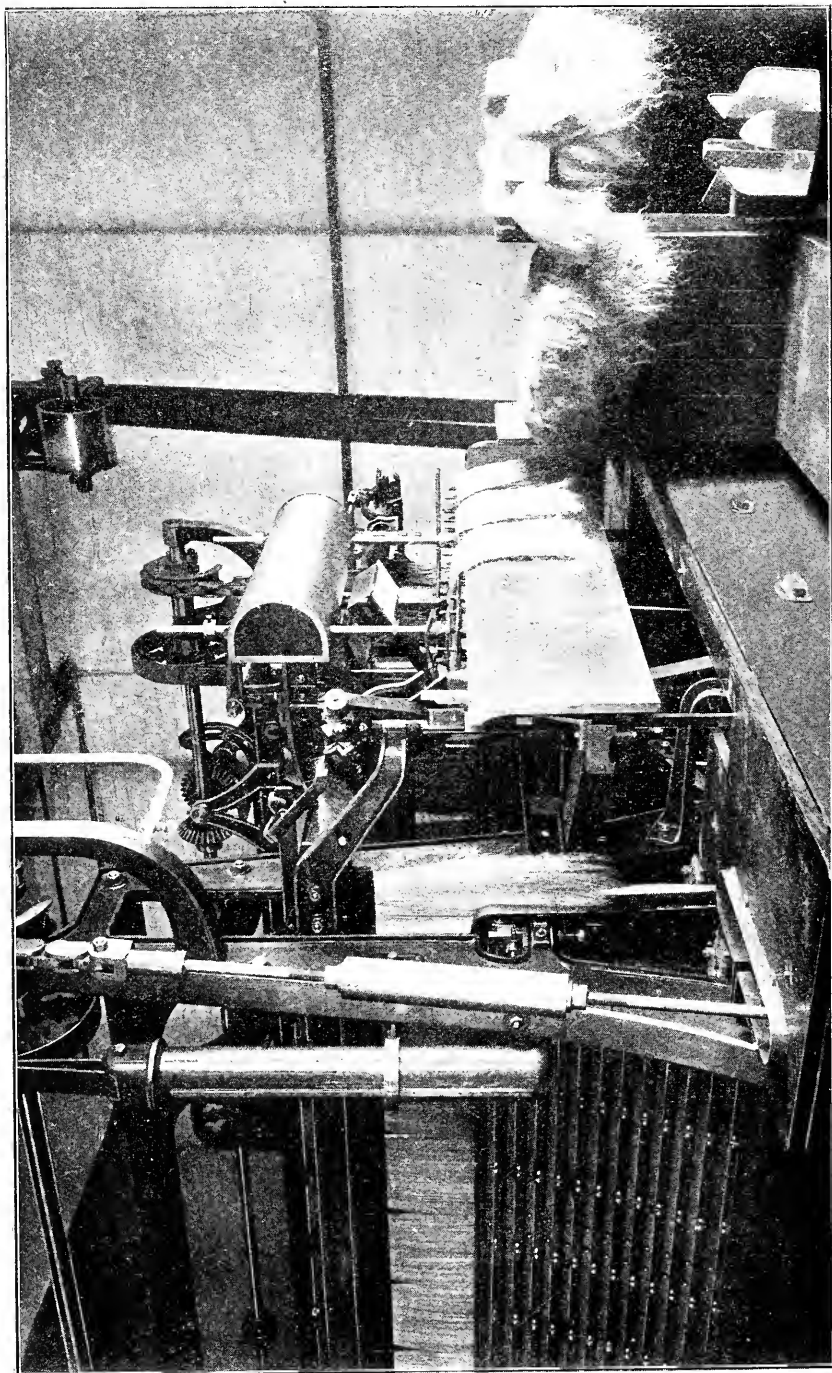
Reade, Crawford, & M'Kibbin's patent automatic screwing for hackling machines. (Filling end.)
